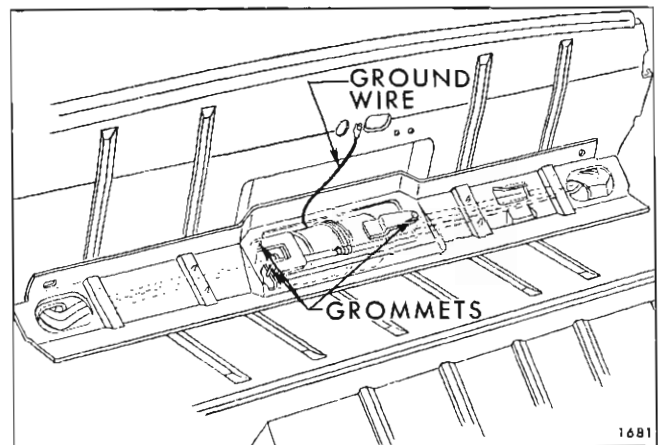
Hydro-Lectric Motor and Pump Assembly
